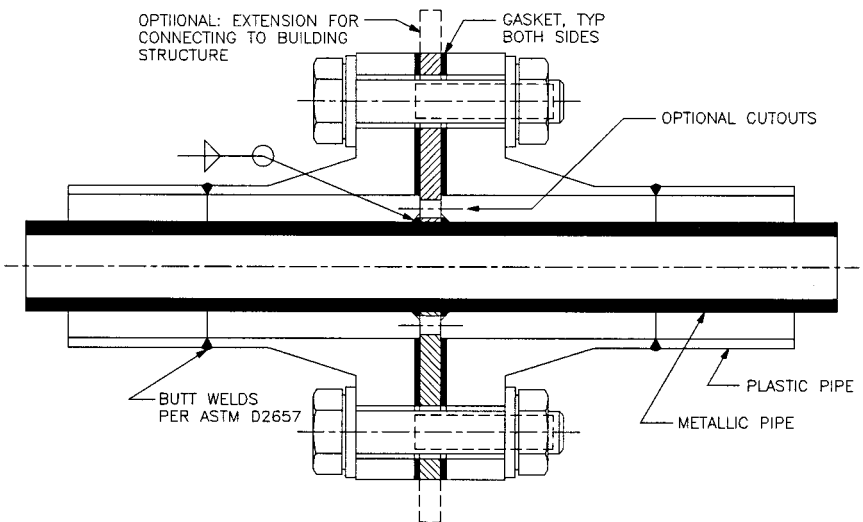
Internal anchoring method for metallic primary, nonmetallic secondary containment piping arrangements.
